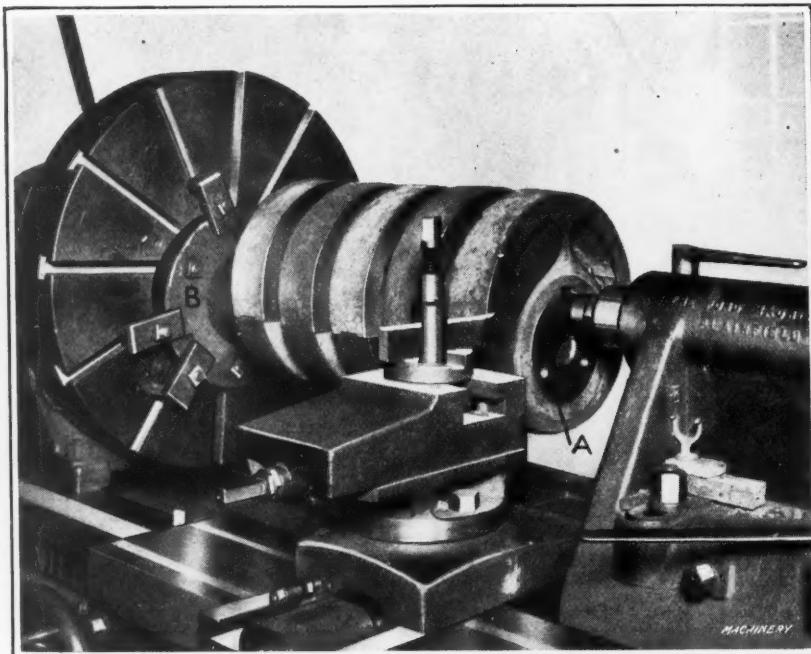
Lathe equipped with a Special Work-holding Mandrel for carrying Six Stephenson Eccentrics
